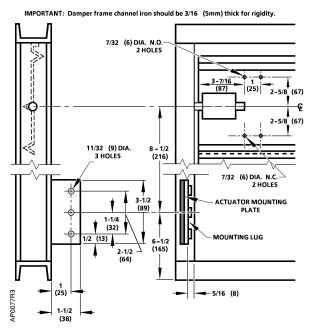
Frame Mounting Dimensions. Dimensions in Inches (Millimeters).
